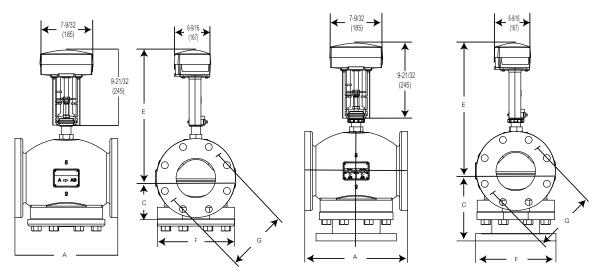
M900Ax Series U-Bolt Style with Flanged 2-Way Globe Valves
